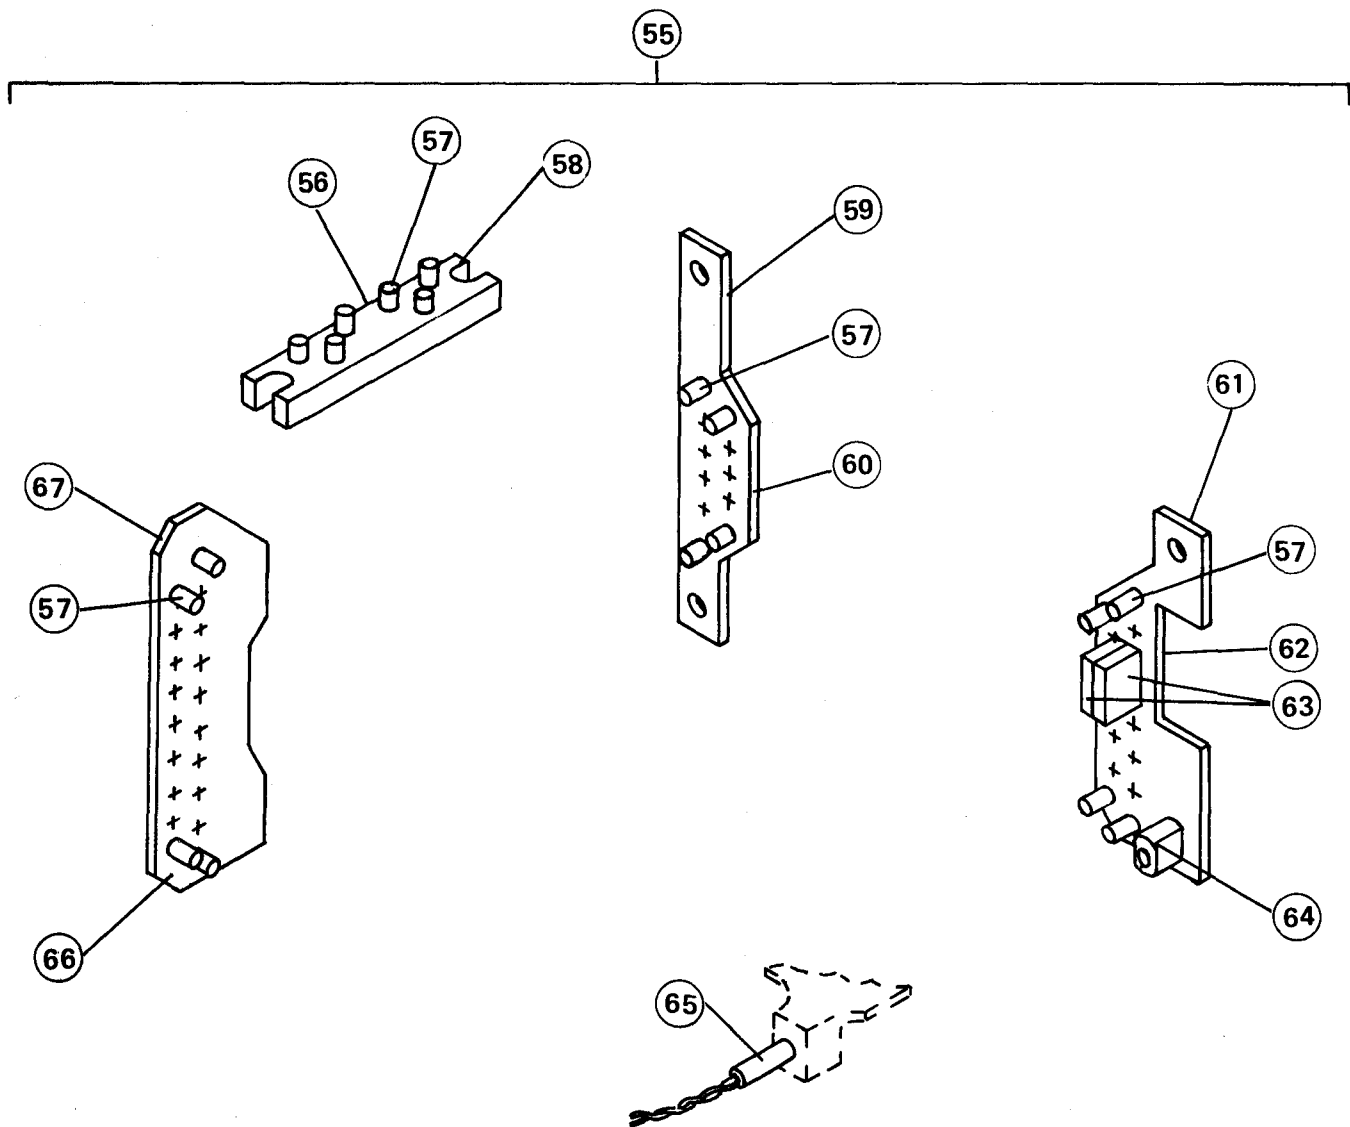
Magnetic tape transport subassembly (sheet 2 of 2)
